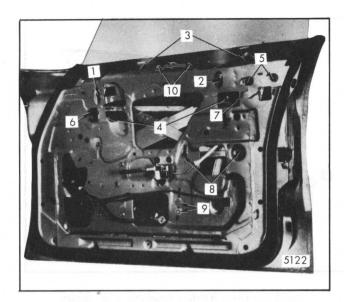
Window Removal and Adjustment - "B and C-39, 49" and "C-69" Styles
